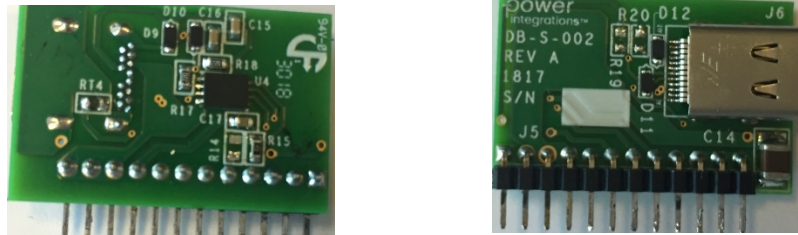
Populated Circuit Board Photograph, Daughter Board. [Front and Rear].
